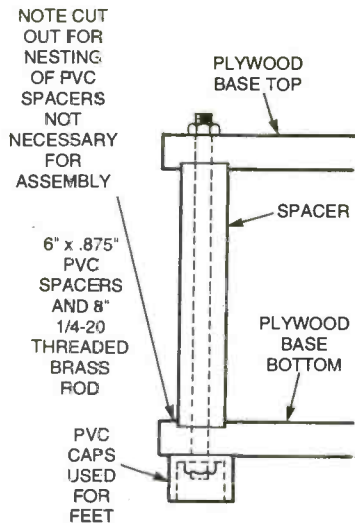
When mounting the two plywood plates together, follow this arrangement. You can use pipe caps for feet.
